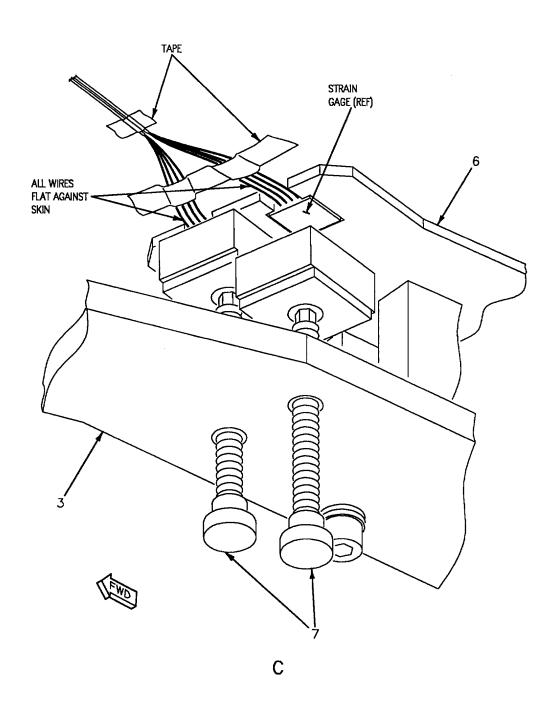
E91903 Strain Gage Bonding Fixture (Sheet 3)
